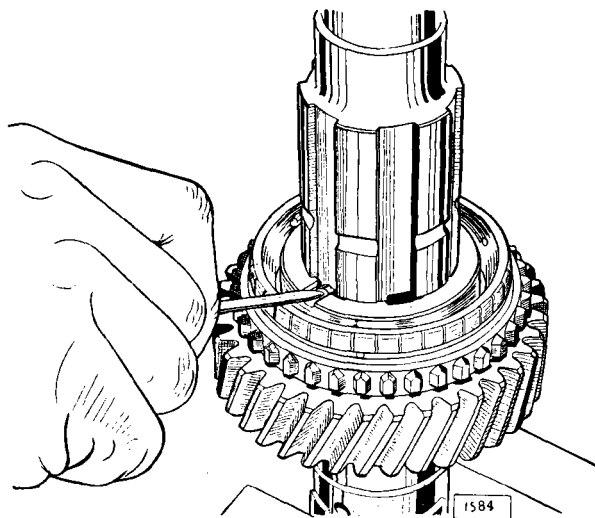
Depressing the 2nd speed thrust washer plunger.
